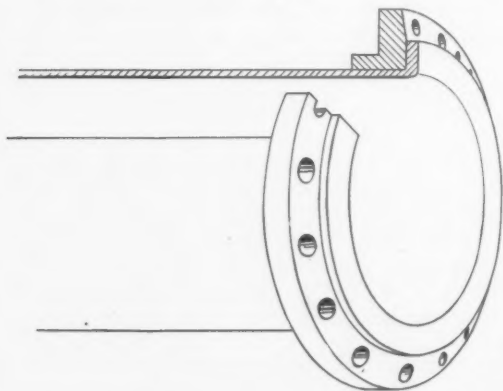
The Double Lap Flanged Pipe Made by the Whitlock Coil Pipe Company, Hartford, Conn.
